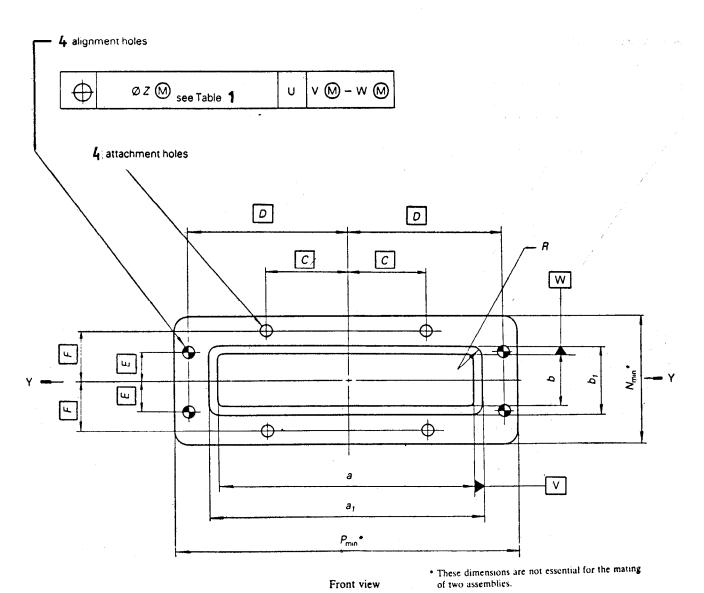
Flange Type L 10738 IS — ULM 401-00 (First Angle Projection)
